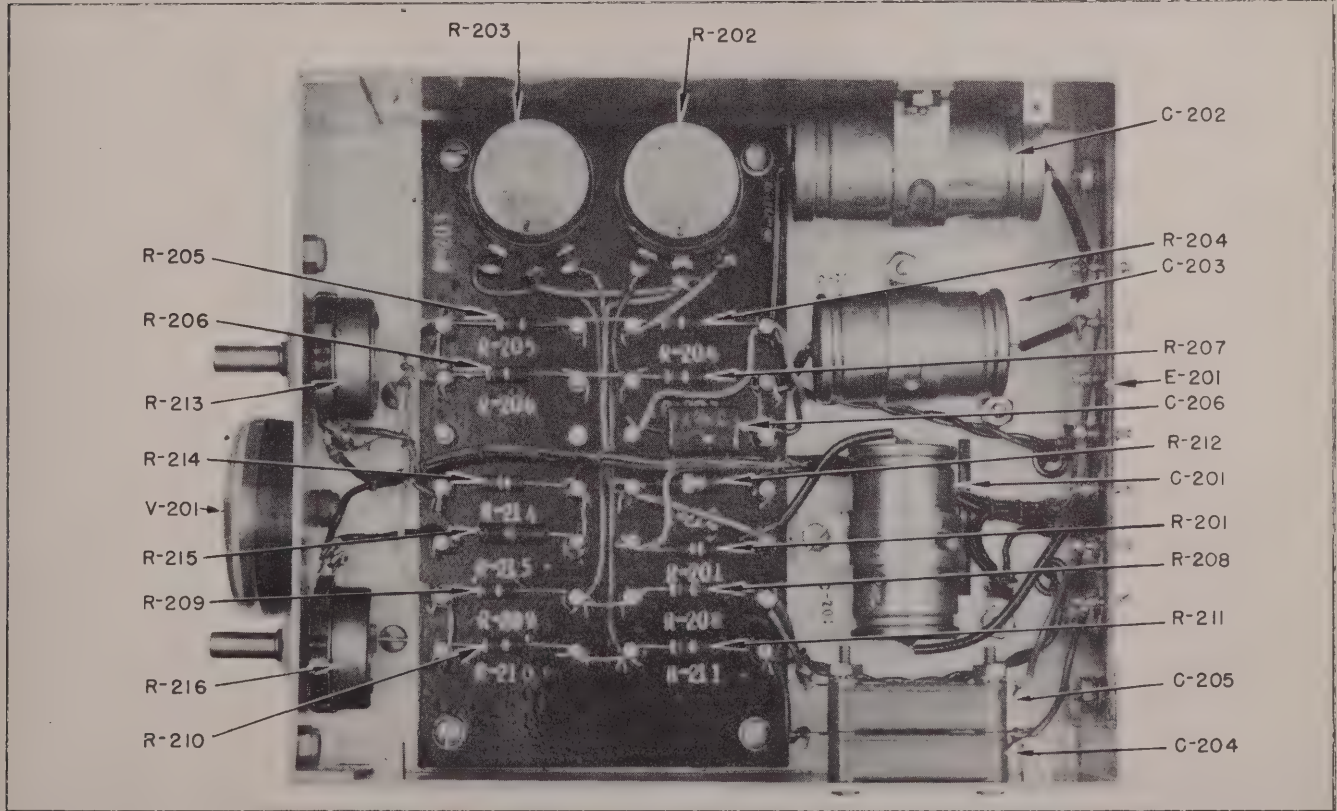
Cathode Ray Indicator Unit, Bottom View
